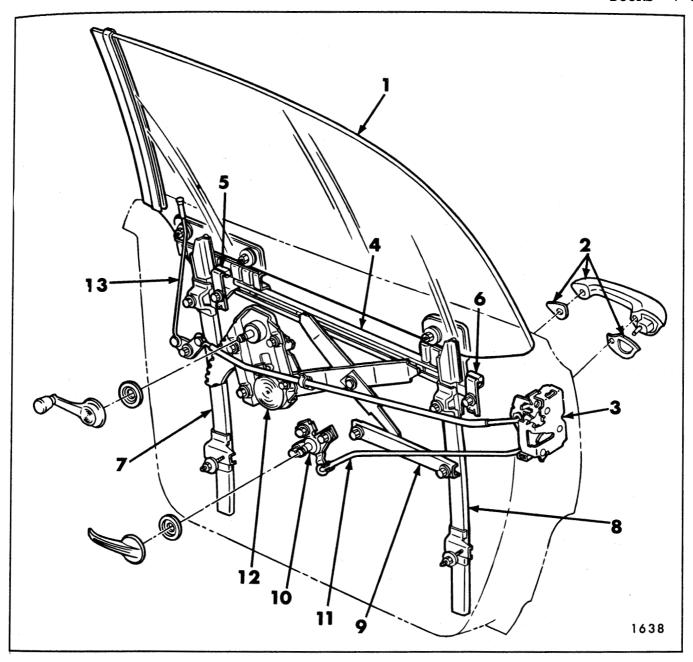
Rear Door Hardware - "Z-39" Styles
